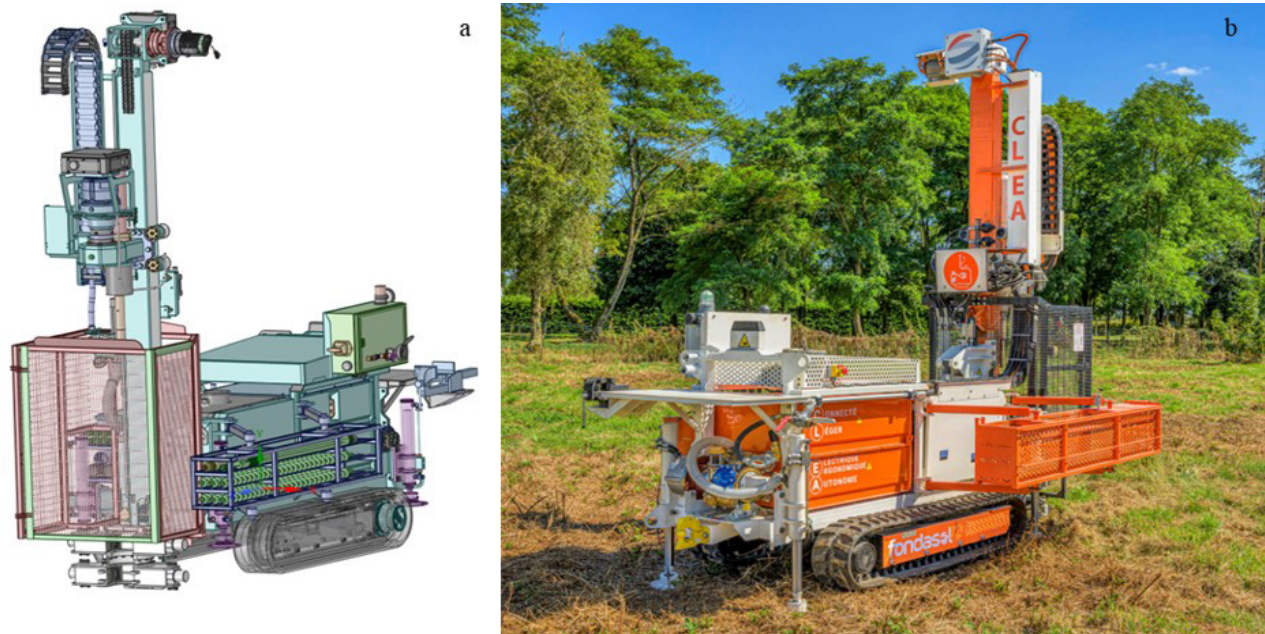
Electric drill rig: a) project prototype (a); finished machine (b).
